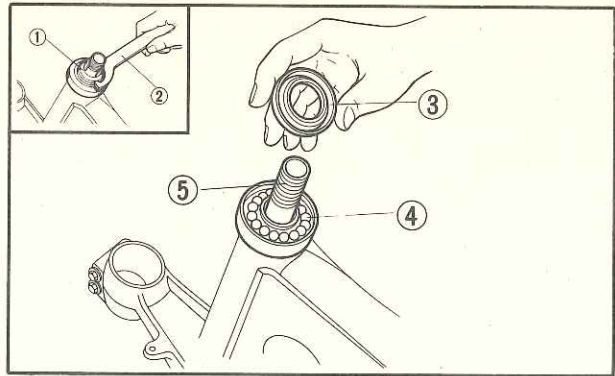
(1) Steering head top thread (4) #8 steel balls
